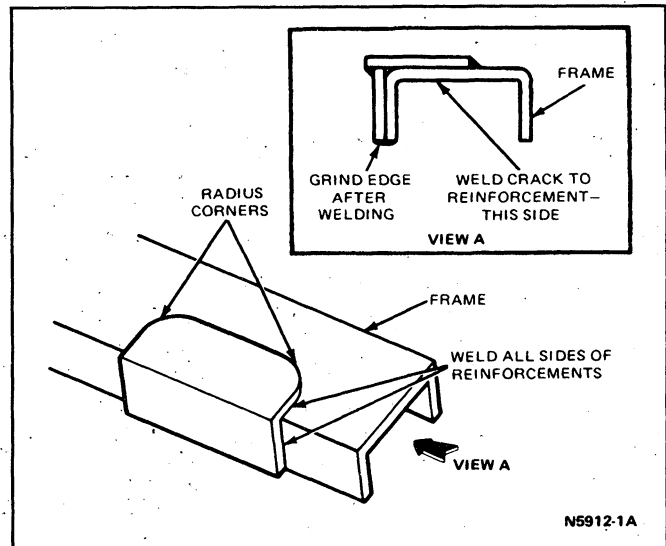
Weld Attachment of Frame Reinforcement—Two Frame Surfaces
